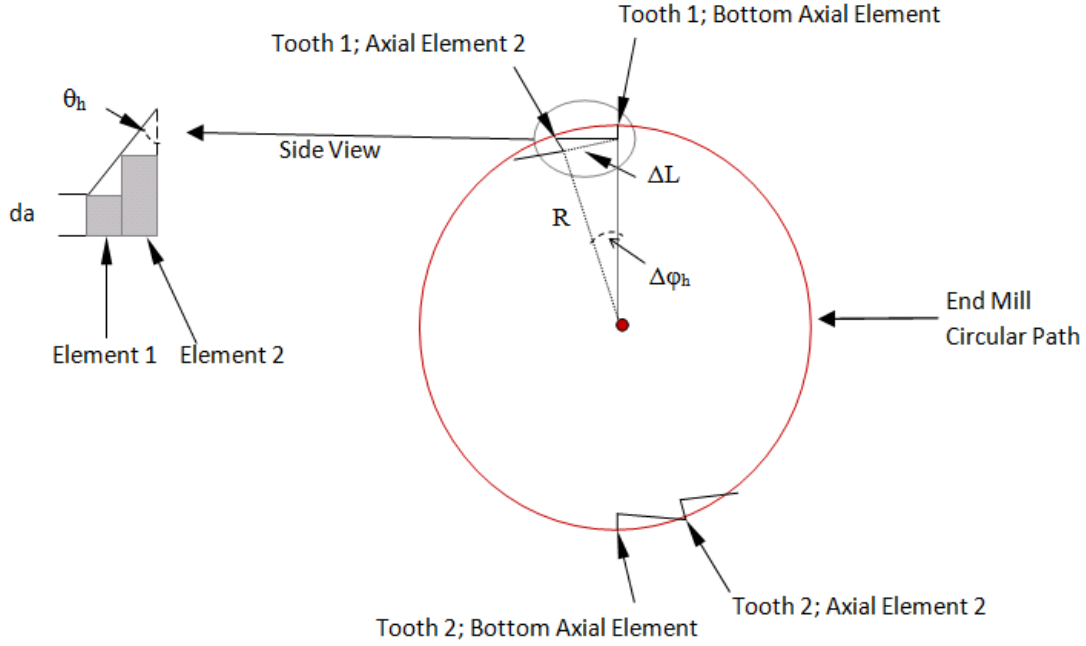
Top view of the tool that shows the two bottom axial elements and the angle between them
